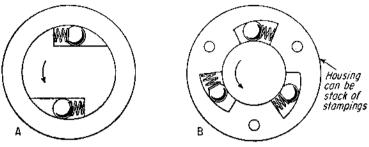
Wedging balls or rollers: internal (A); external (B) clutches.
